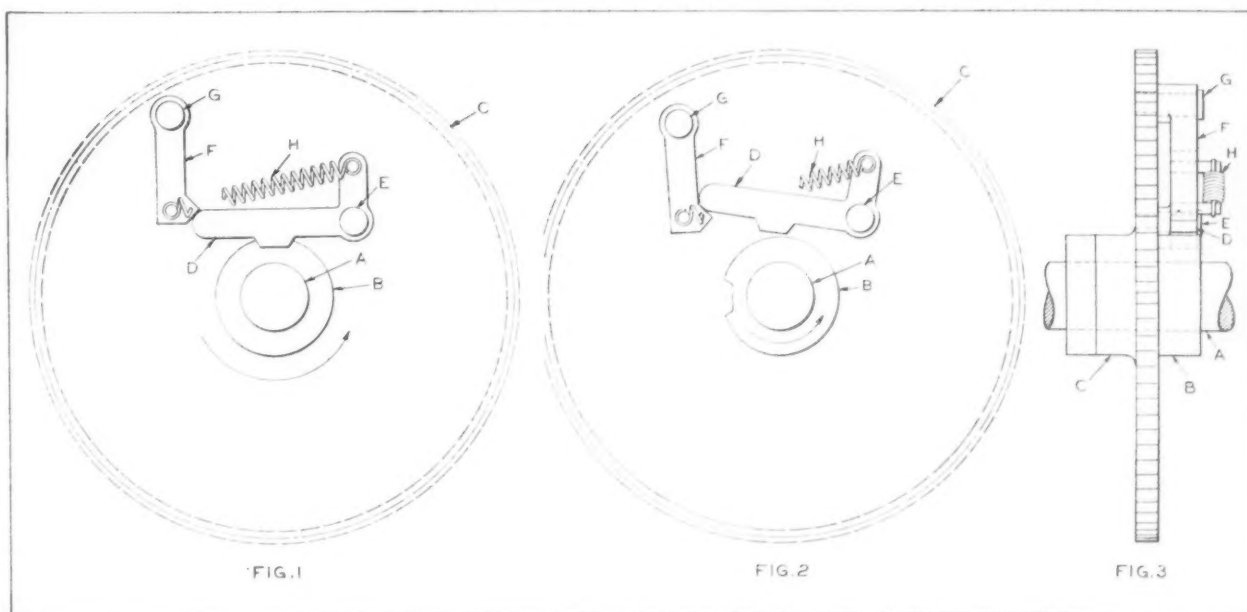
Overload Release Clutch Mechanism with Driving Members Engaged. Fig. 2. Mechanism of Clutch Shown in Fig. 1 Released by Overload. Fig. 3. End View of Clutch Shown in Figs. 1 and 2
